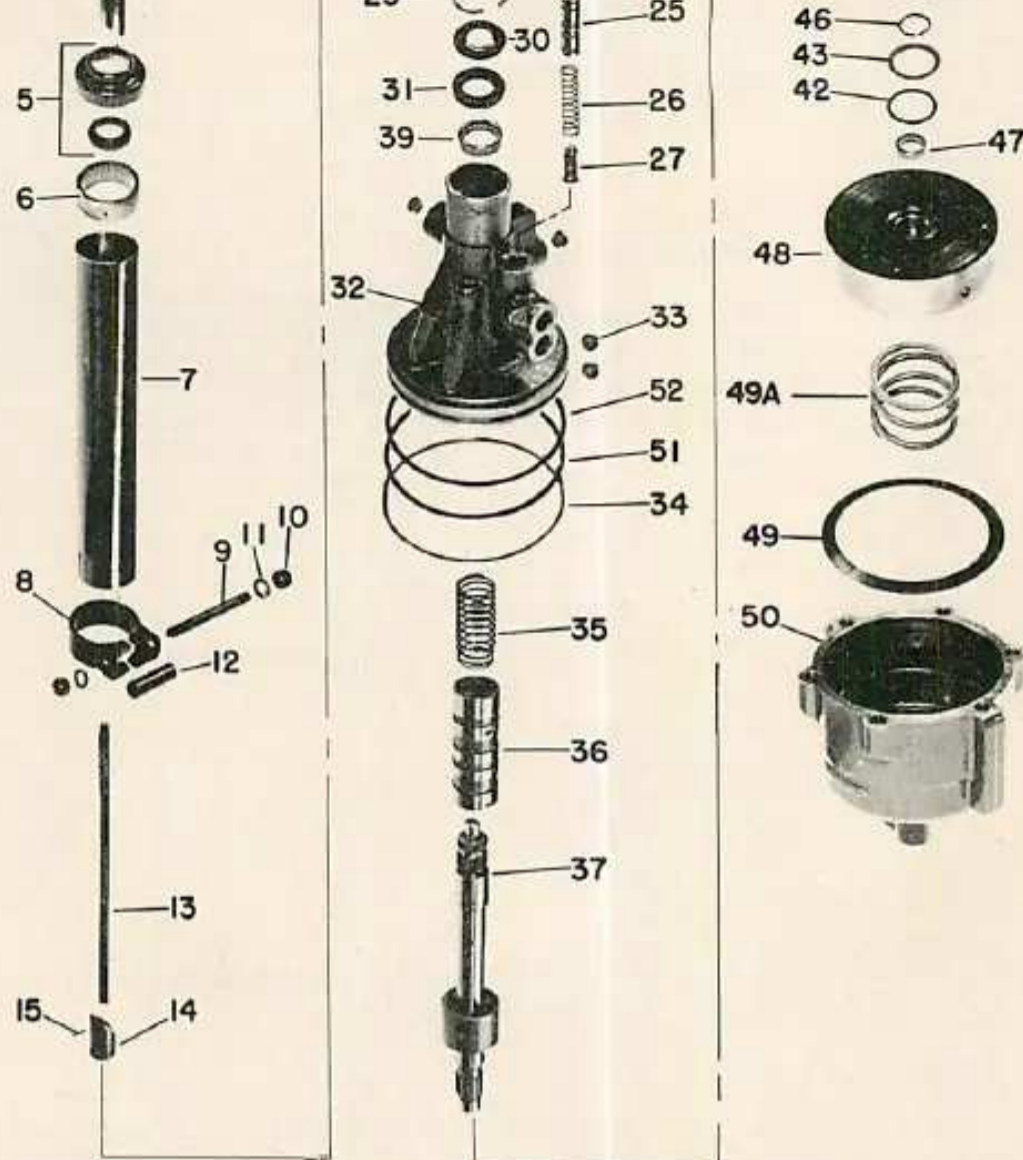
Exploded view of composite early and late production Hydramotor steering unit. On early production units, cover (50) is retained to housing (32) by pivot bracket (3) and capscrews (1); "O" ring (51) is located in groove of housing and a Belleville washer (49) pressure plate spring is used. On late production models, cover is retained to housing by snap ring (52); "O" ring (51) and backup ring (34) are located in groove in I.D. of cover and a coil type pressure plate spring (49A) is used.
